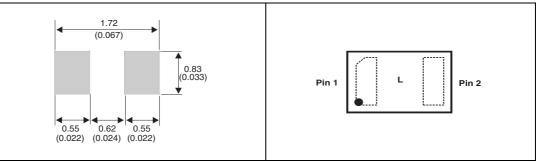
Footprint dimensions in mm Figure 12. Marking (inches)
